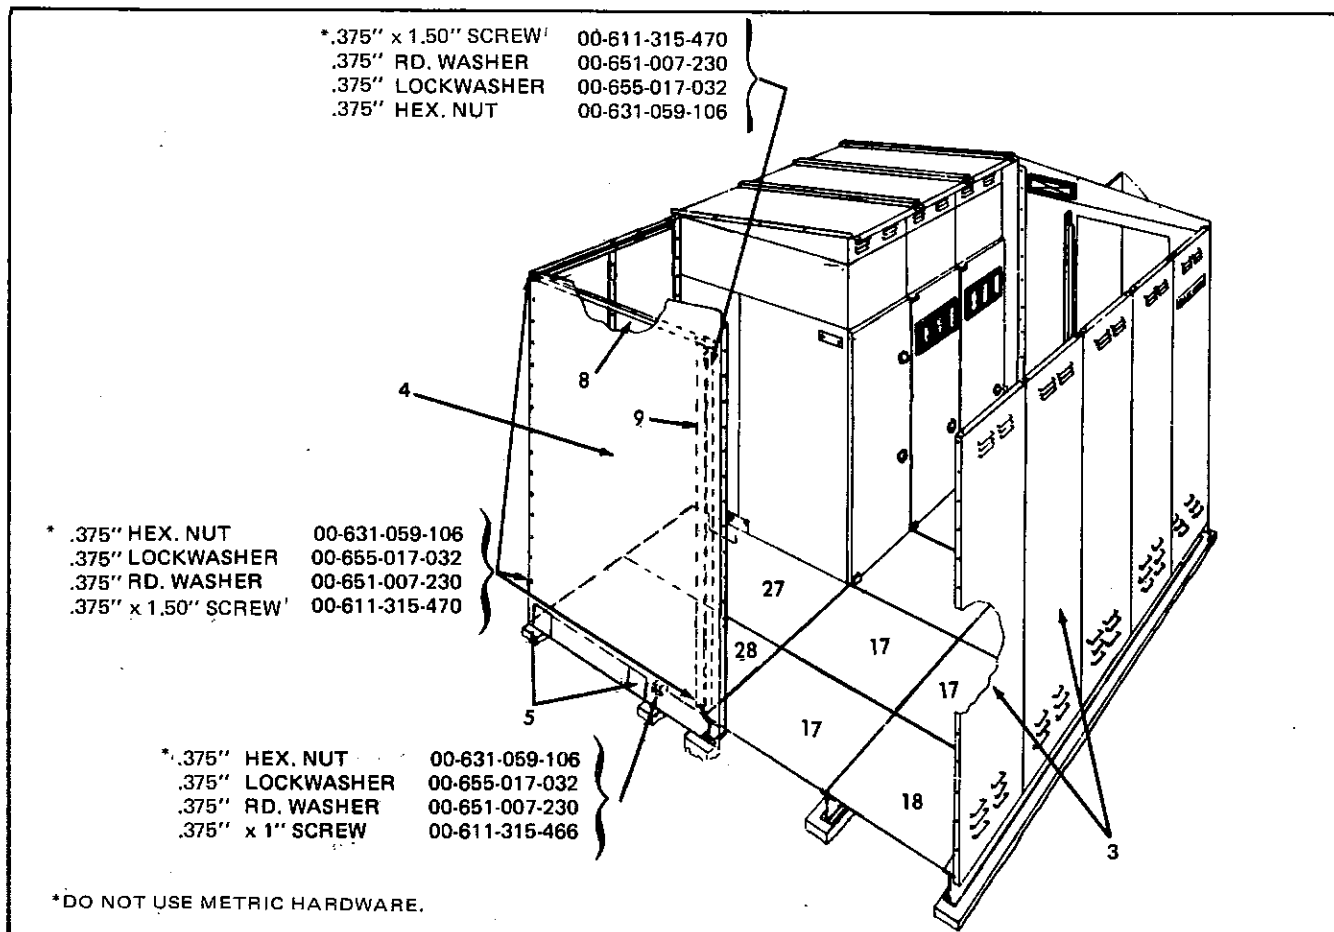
End Cover Installation (5 kV) – Single Aisle with Work Space
